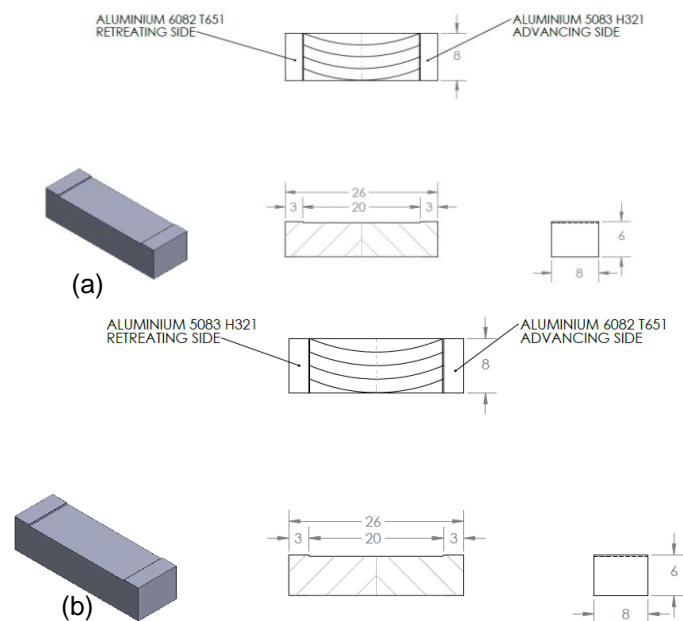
CAD drawing for metallography and micro-hardness specimens
